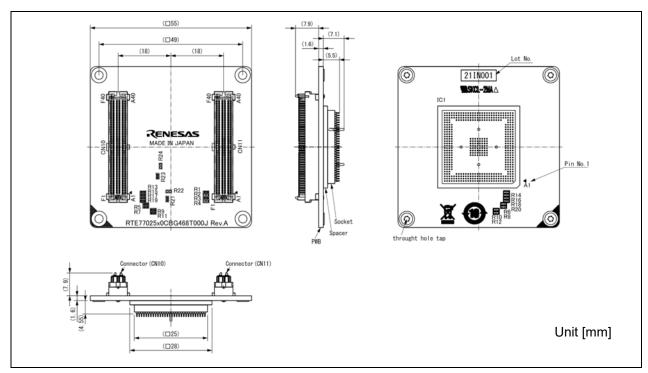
Dimensions of the RTE77025x0CBG468T000J (468 Pins)
